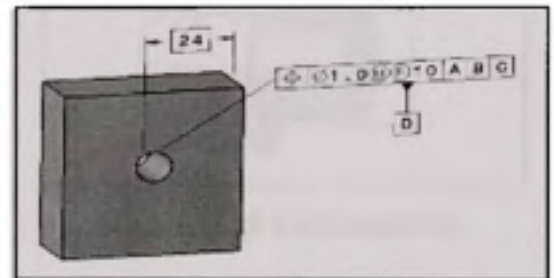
Datum reference, Basic dimension symbol, Material condition, Project tolerance zone.
